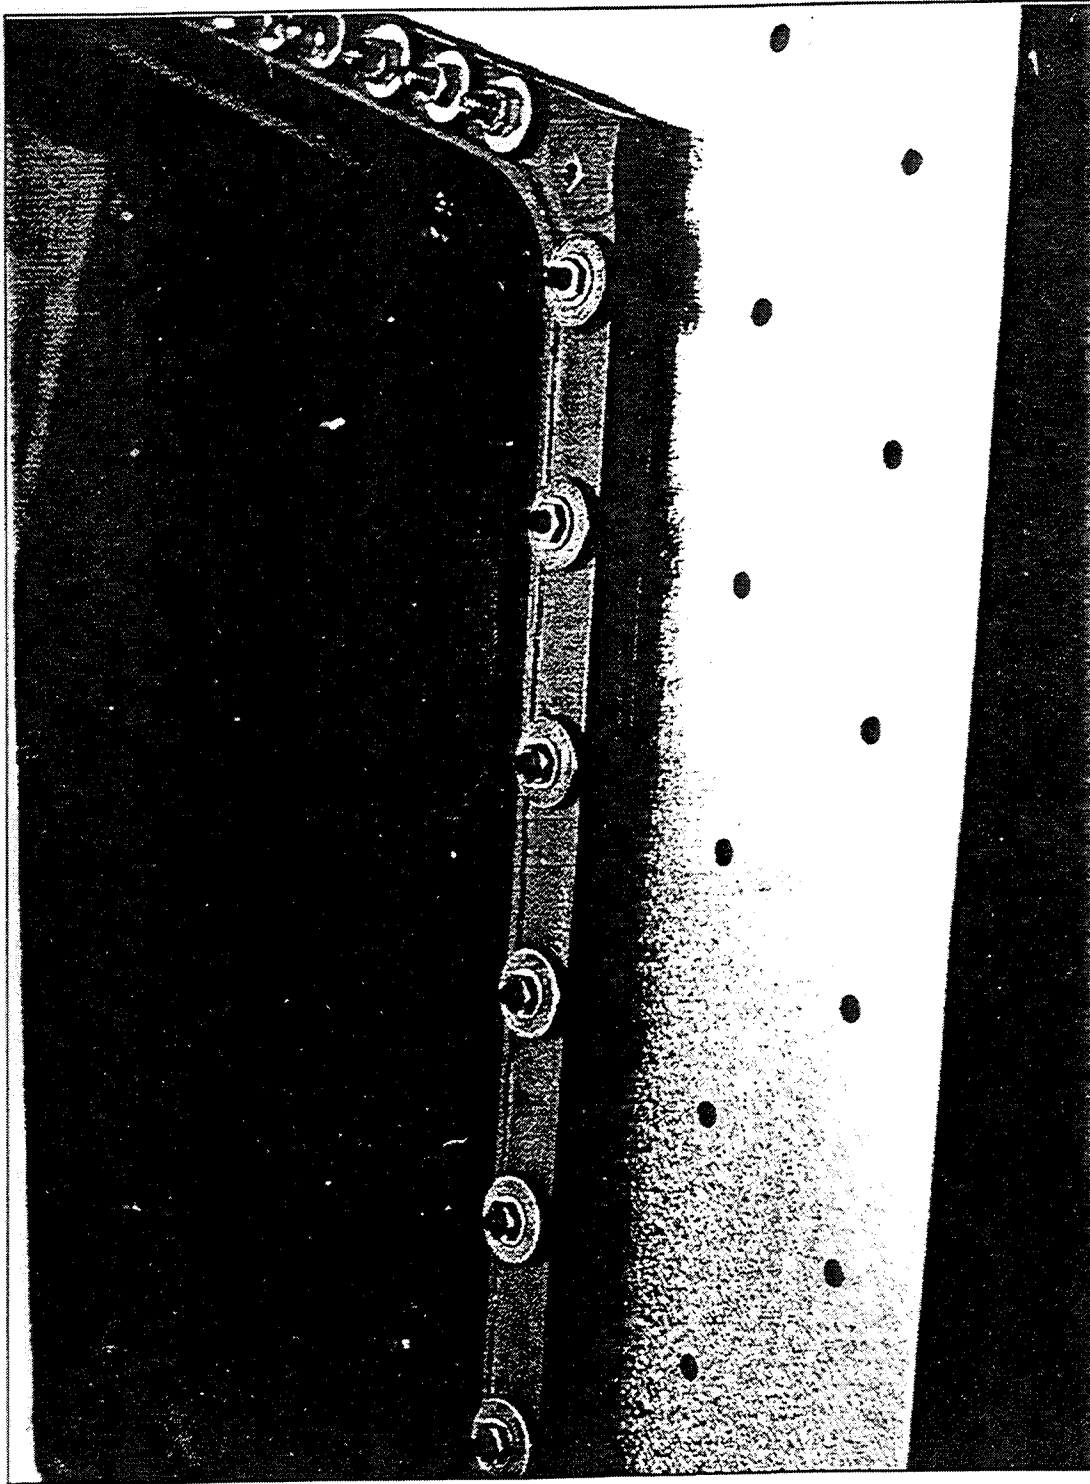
C/KC-135 #1 W/WS Mounting Hardware Details
